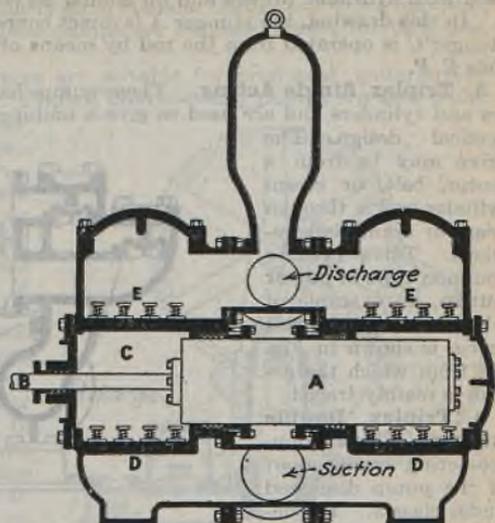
Water end of a double-acting steam-driven reciprocating pump.
